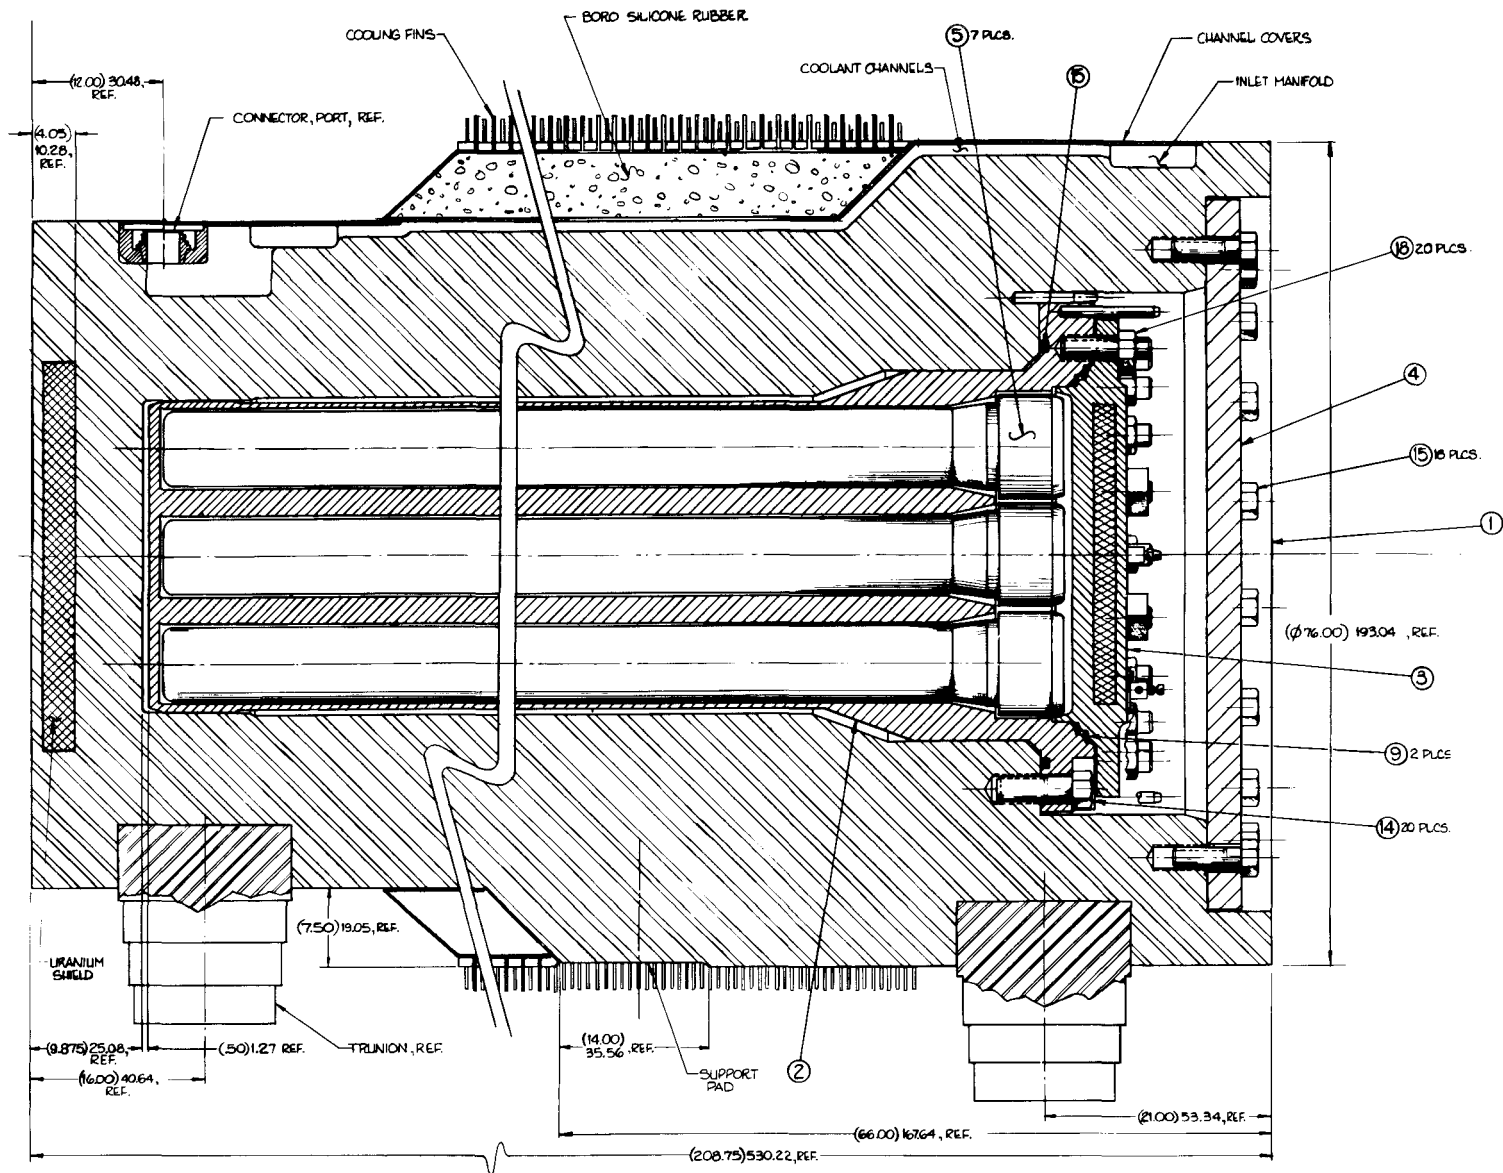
Cask Assembly—Two Levels of Containment, B-F2 Concept
